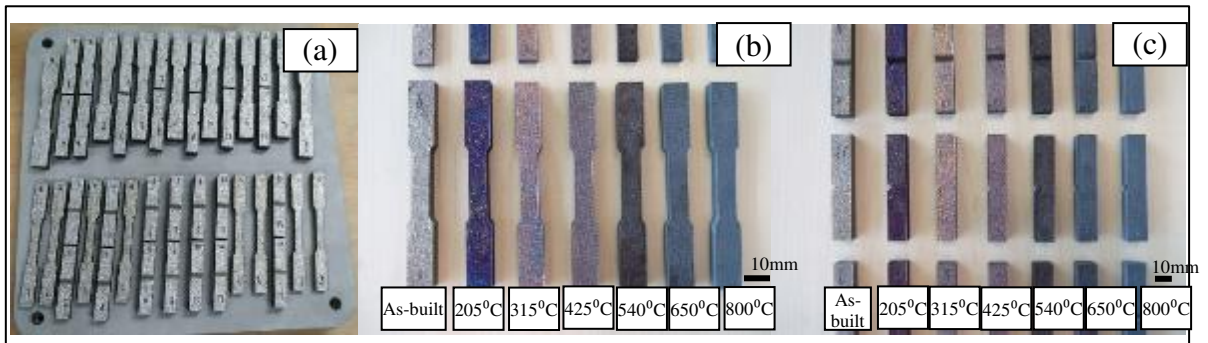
SLM built test coupons. (a) As-built on build plate; (b) Tensile test coupons following heat treatment; (c) Charpy test coupons following heat treatment
